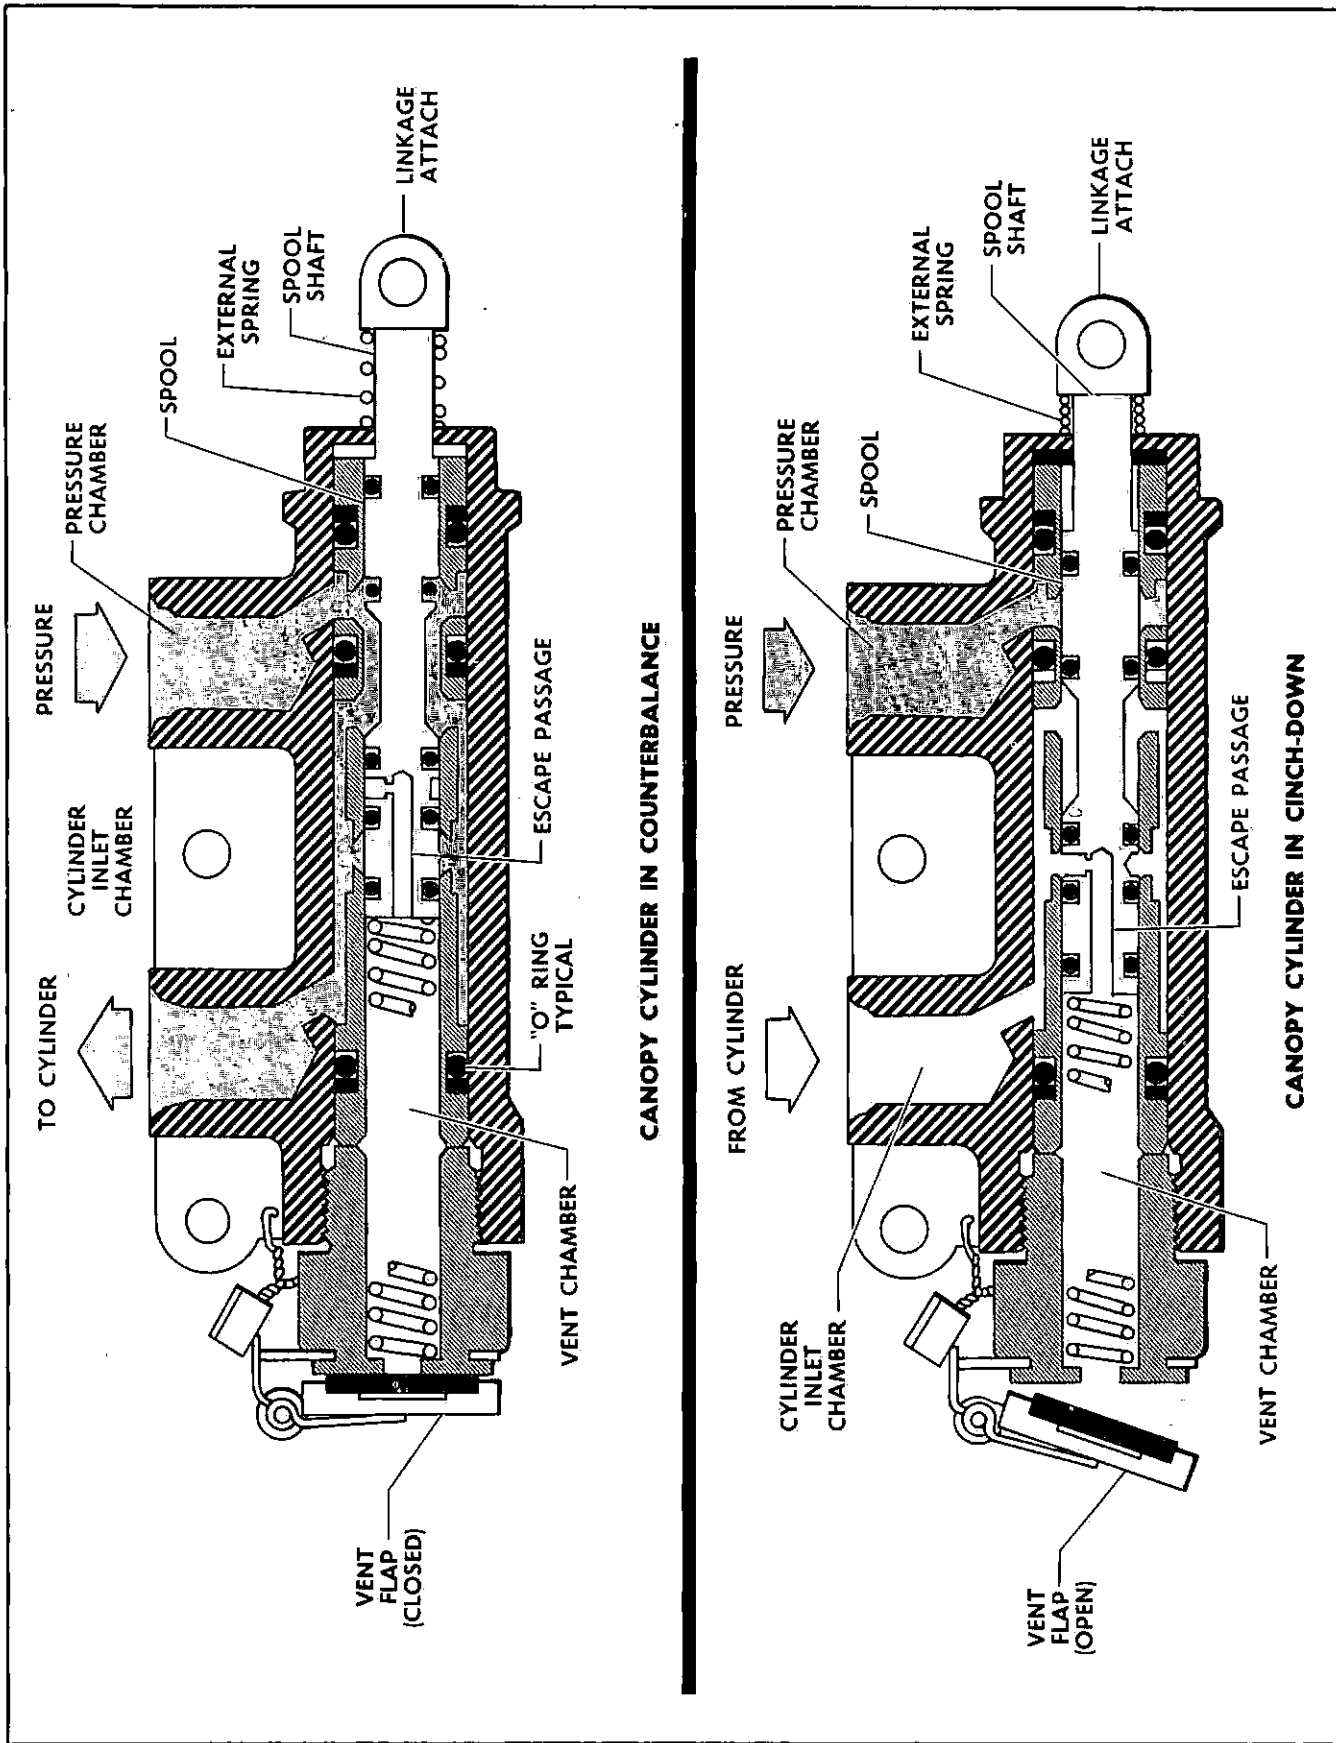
Canopy Counterbalance Remover Cylinder Selector Valve
